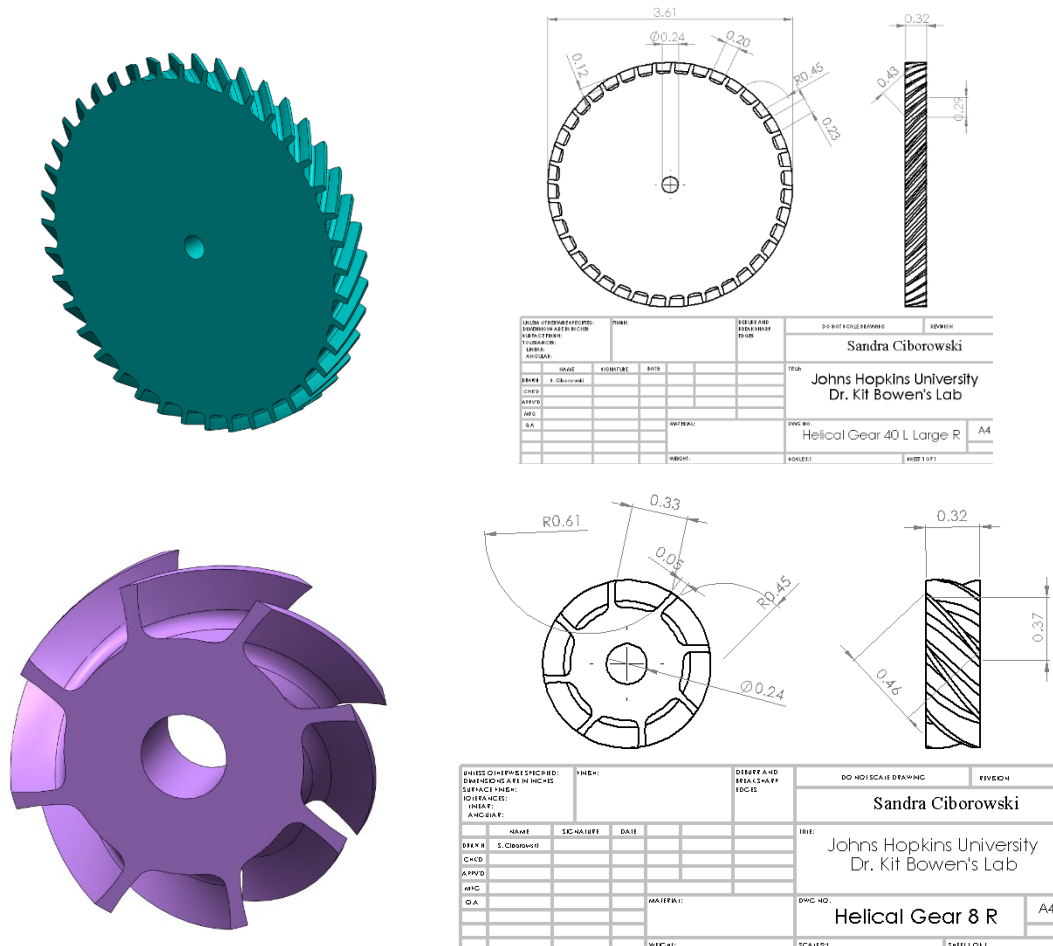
Helical Gear Designs with (A) 40 Left-Handed Teeth and (B) 8 Right-Handed Teeth.
